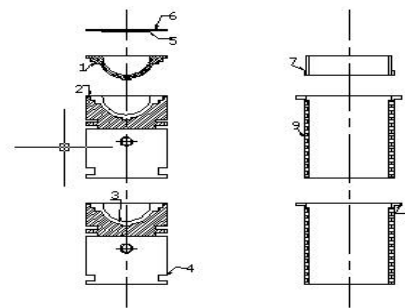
1.Superni crown with threads, 2. Superni gasket, 3.Air gap in piston, 4. Body of the piston, 5. Ceramic coating on inside portion of cylinder head, 6. Cylinder head, 7. Superni insert with threads, 8. Air gap in liner and 9. Body of liner
